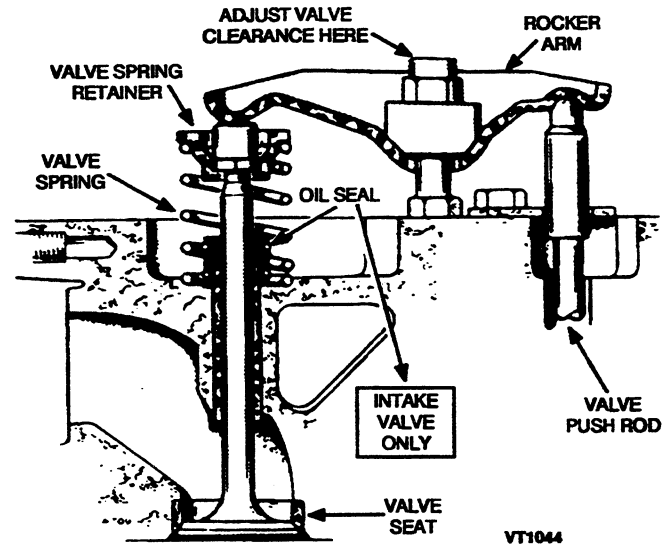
VALVE CLEARANCE ADJUSTMENTS
